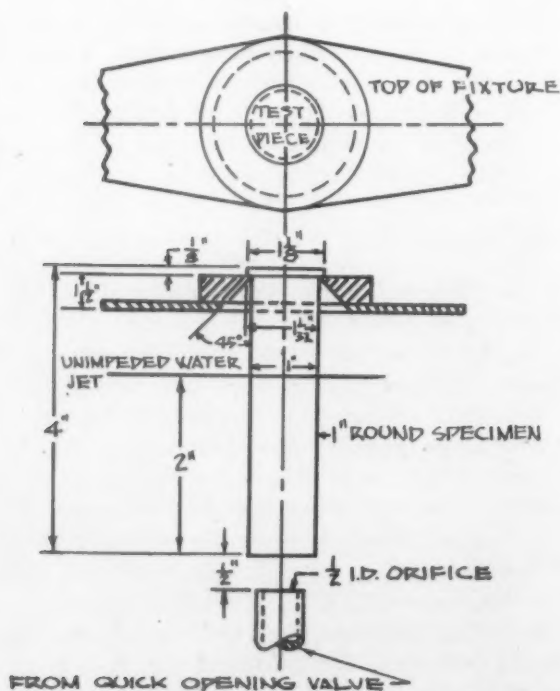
END-QUENCH STEEL SPECIMEN AND FIXTURE.
